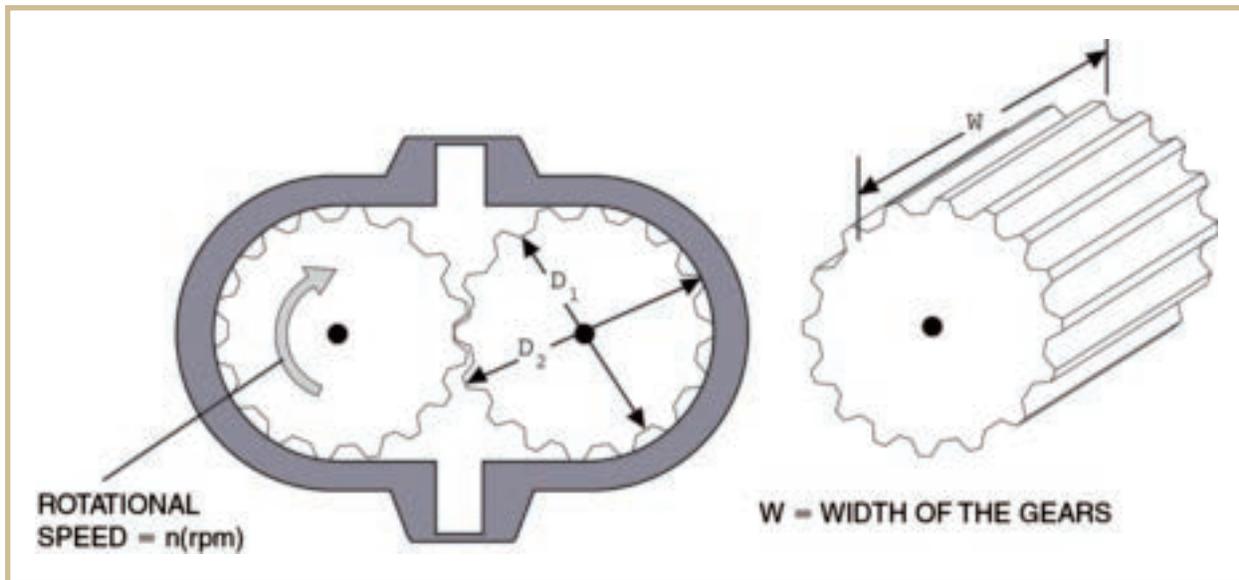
This gear pump is an example of a positive-displacement pump.
